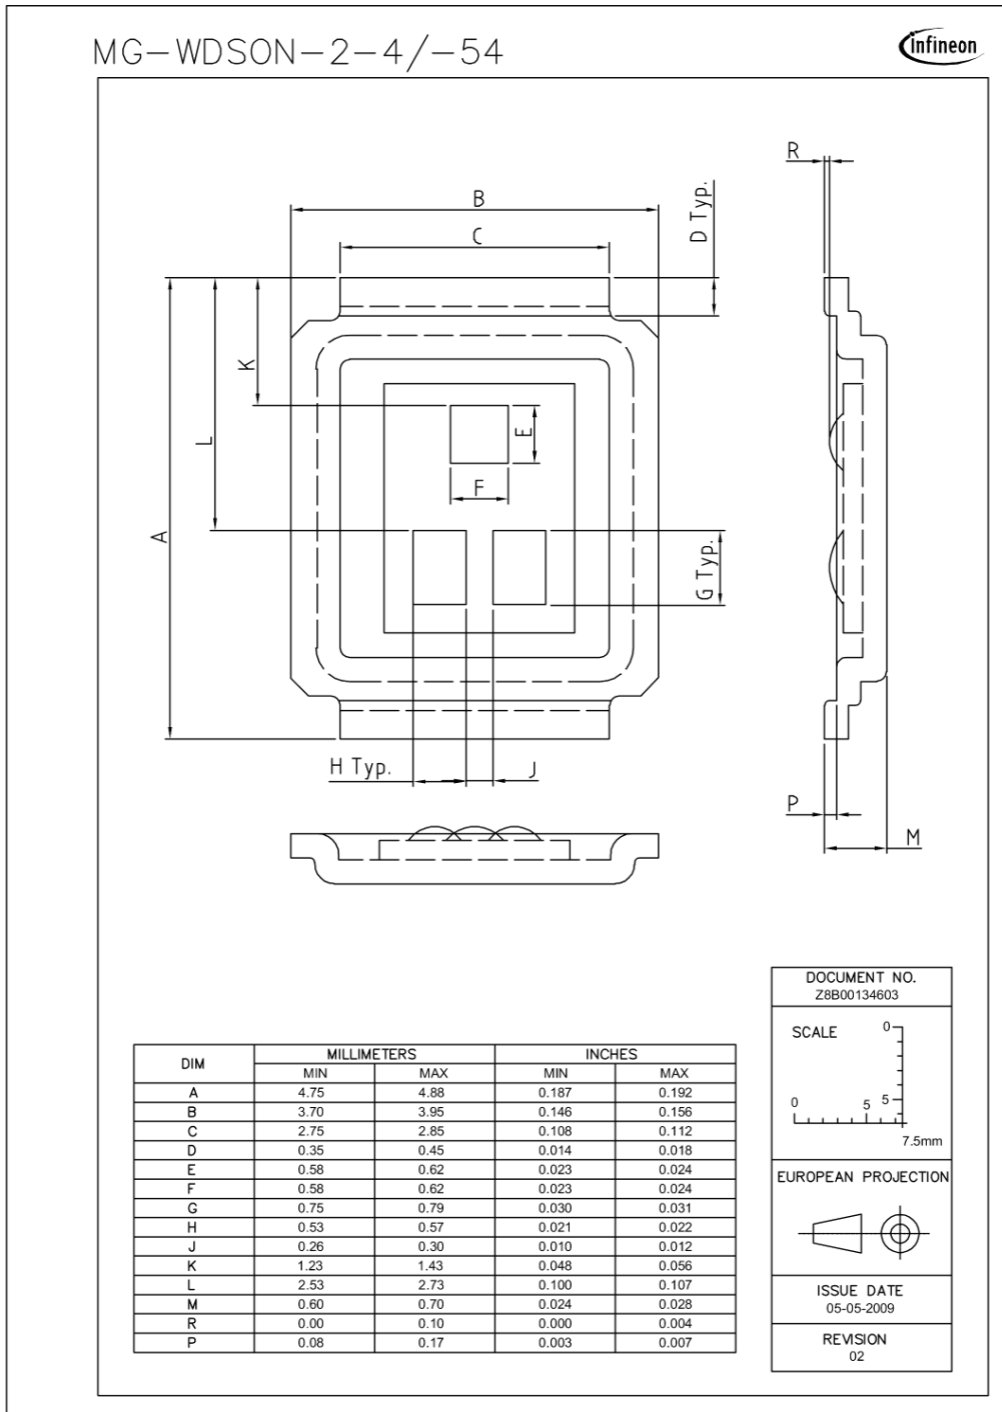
Outlines MG-WDSO-2, dimensions in mm/inches
